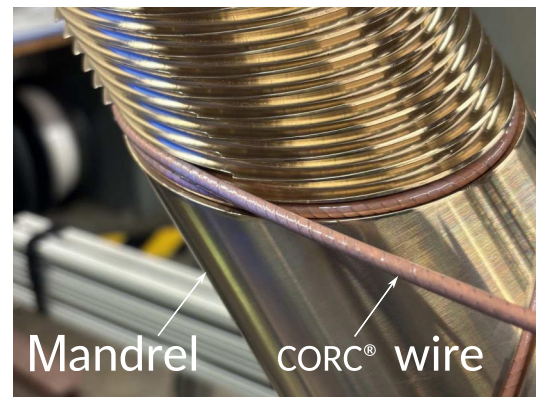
CORC[®] wire settles in the groove machined on Layer 2 mandrel.
